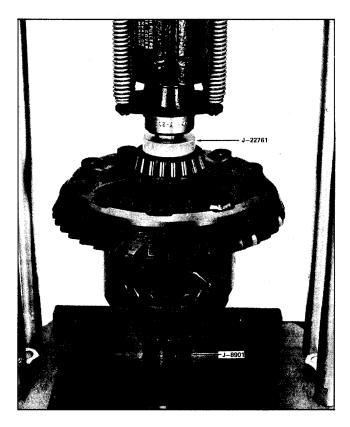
A-26 Installing Left Differential Side Bearing - B Series
